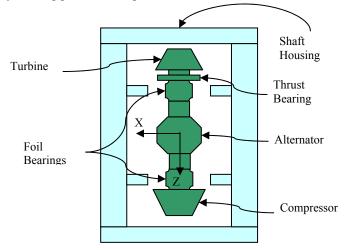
Brayton Power Conversion Unit, Model-1, Shaft Assembly Representation
